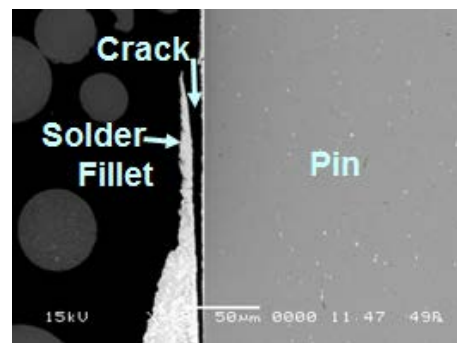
Close Up View of a Solder Fillet Crack Showing Separation from the Pin (275X)
